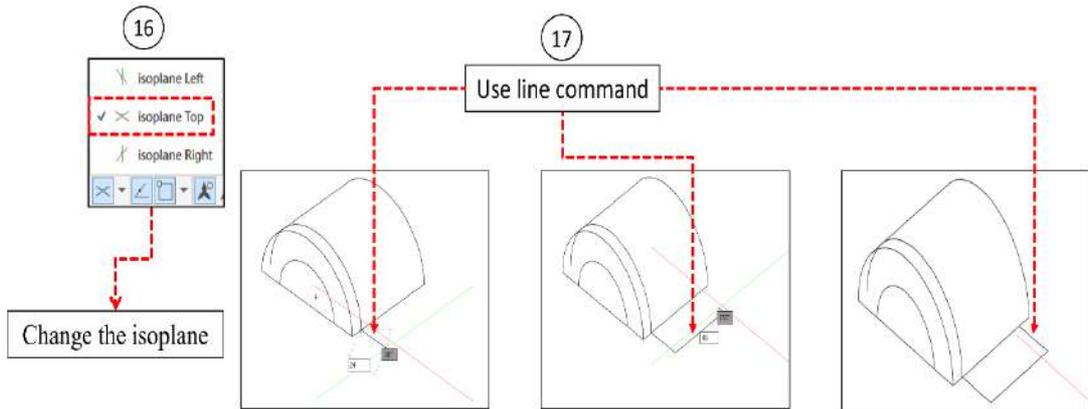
Example of an isometric drawing (Step 16 and 17)
